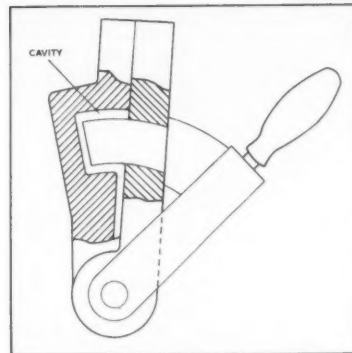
A hinged die in which the core is retracted along an arc and the casting brought out with it: further movement of the core strips it from the casting
